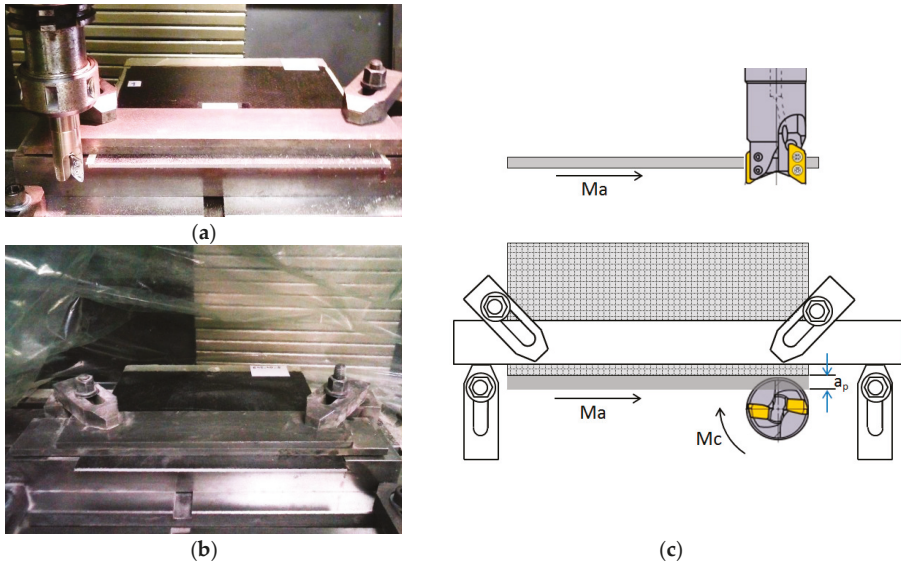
(a) Fixture with clamps; (b) Film bag; (c) Down milling schema.
